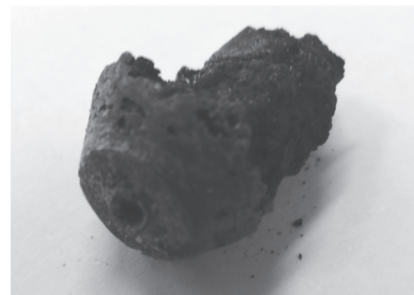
Sintered lubricant removed from the exit cone of a die after drawing process at a speed of 25 m/s
